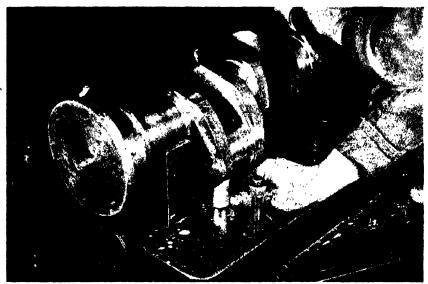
Drilling oilholes in a crankshaft (1) The adjusting piece being put in position. (A.E.C., Ltd.)
